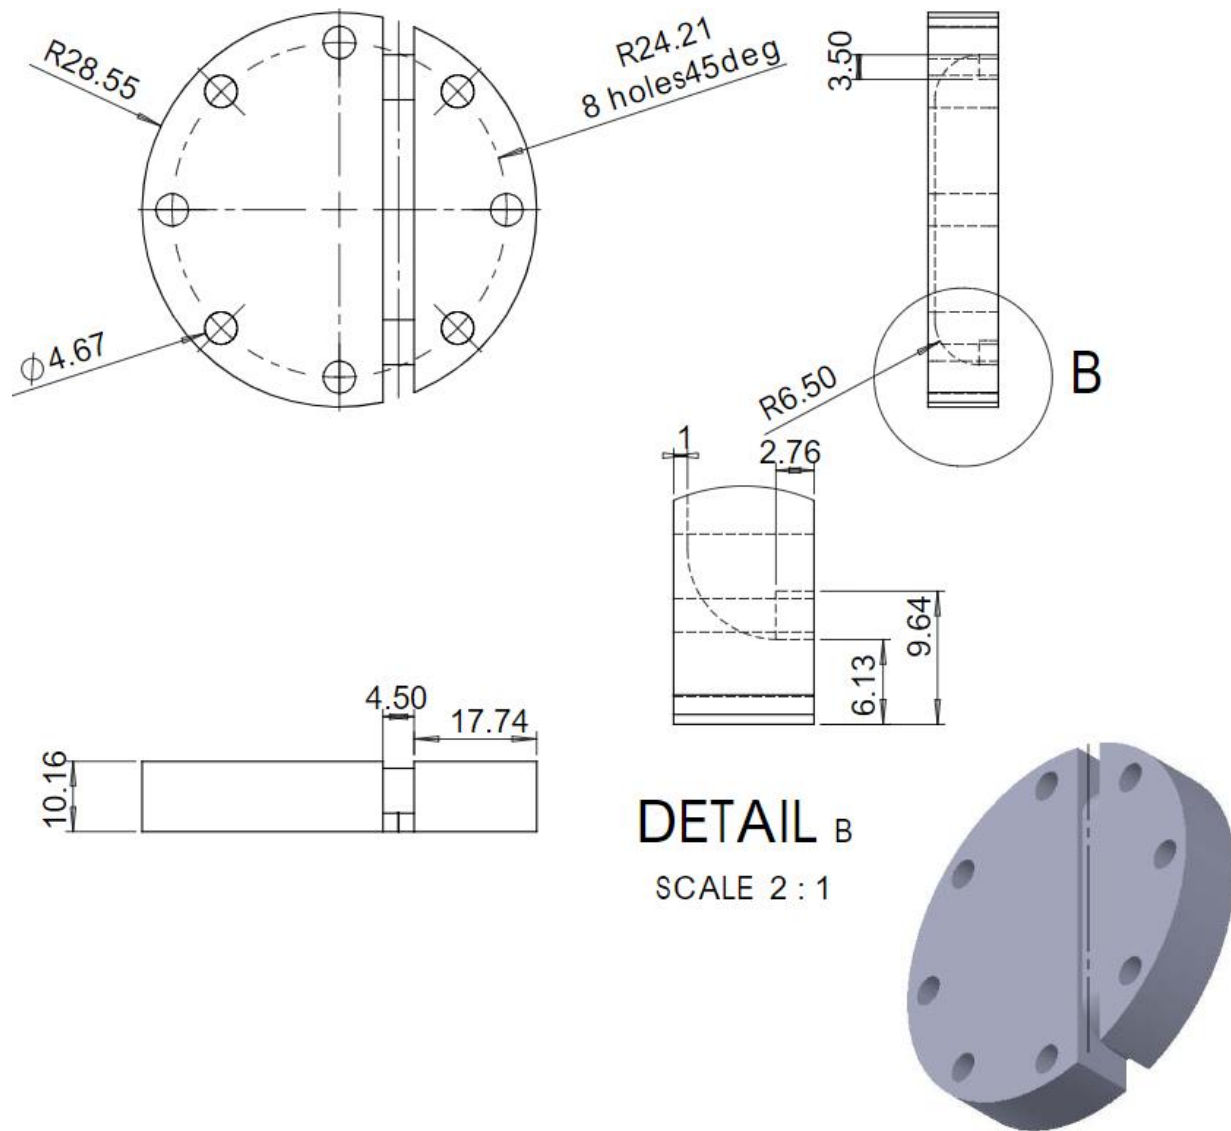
Geometry Dimensions for the copper plate machined to interface the current leads to the cryocooler cold head
